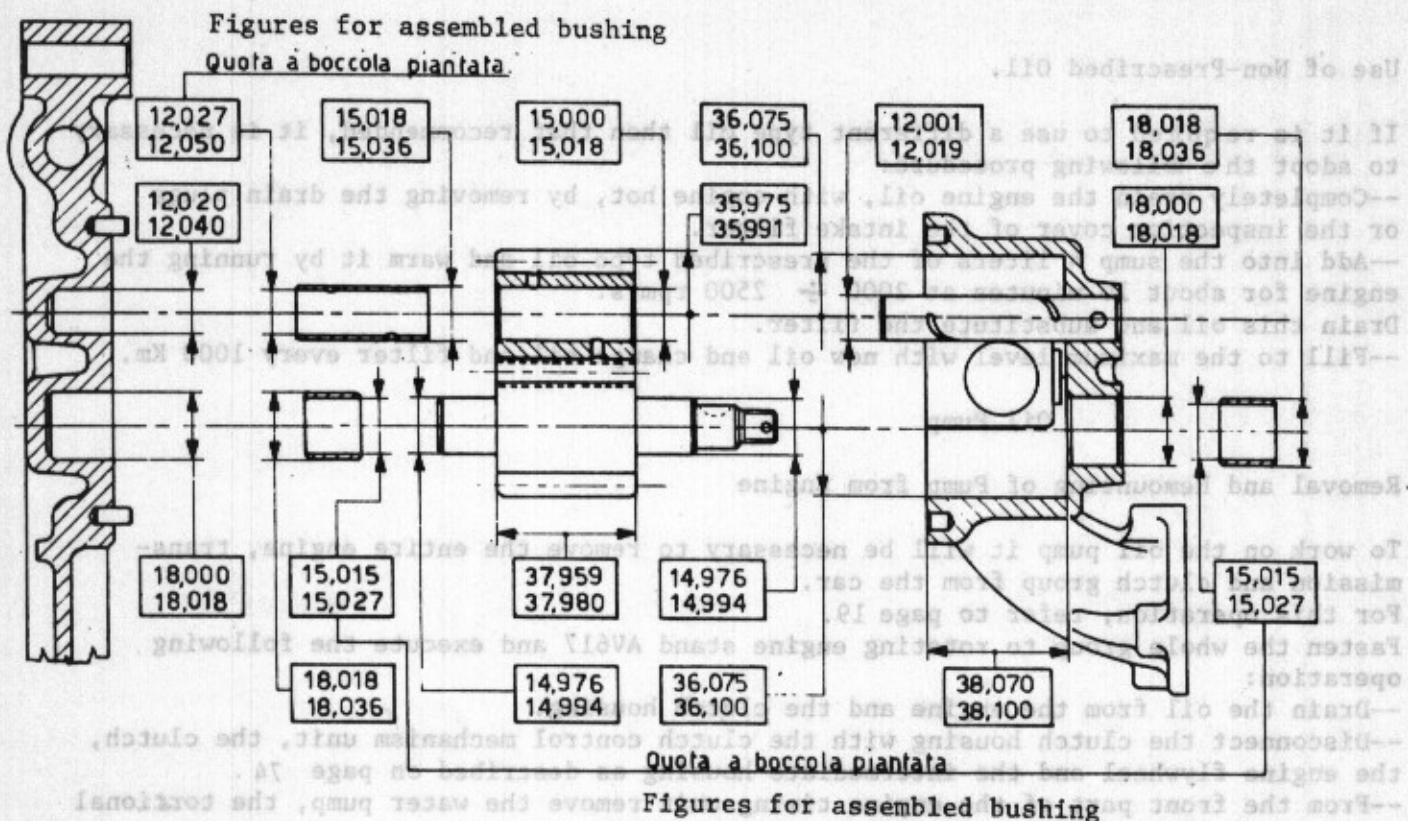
Principal data for clearance checks of oil pump and oil pump drive units.
